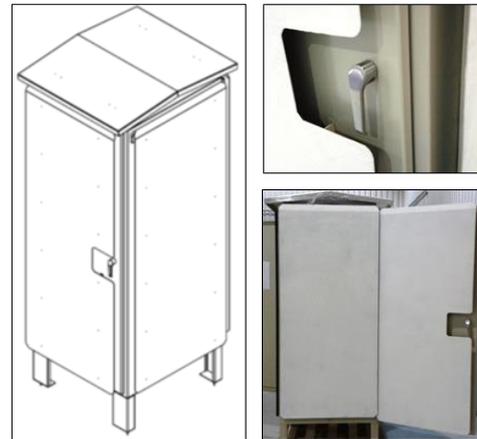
Construction details of outdoor kiosks for analogue merging units and switchgear control units
